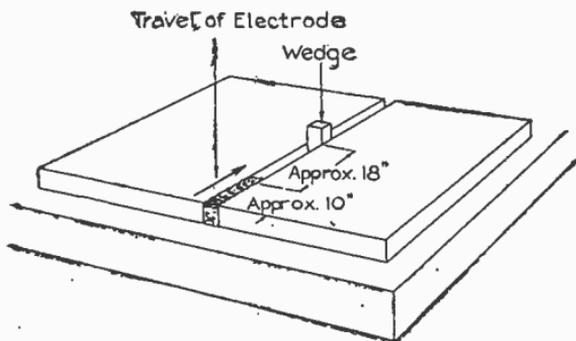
,055.—Method of reducing contraction by locking up the stresses produced. When welding long seams, the drawing may be reduced to almost nothing by the use of spacing blocks or wedges placed in the opening approximately 18 ins. from the section being welded, and toward the end of the seam to which the weld is progressing.
